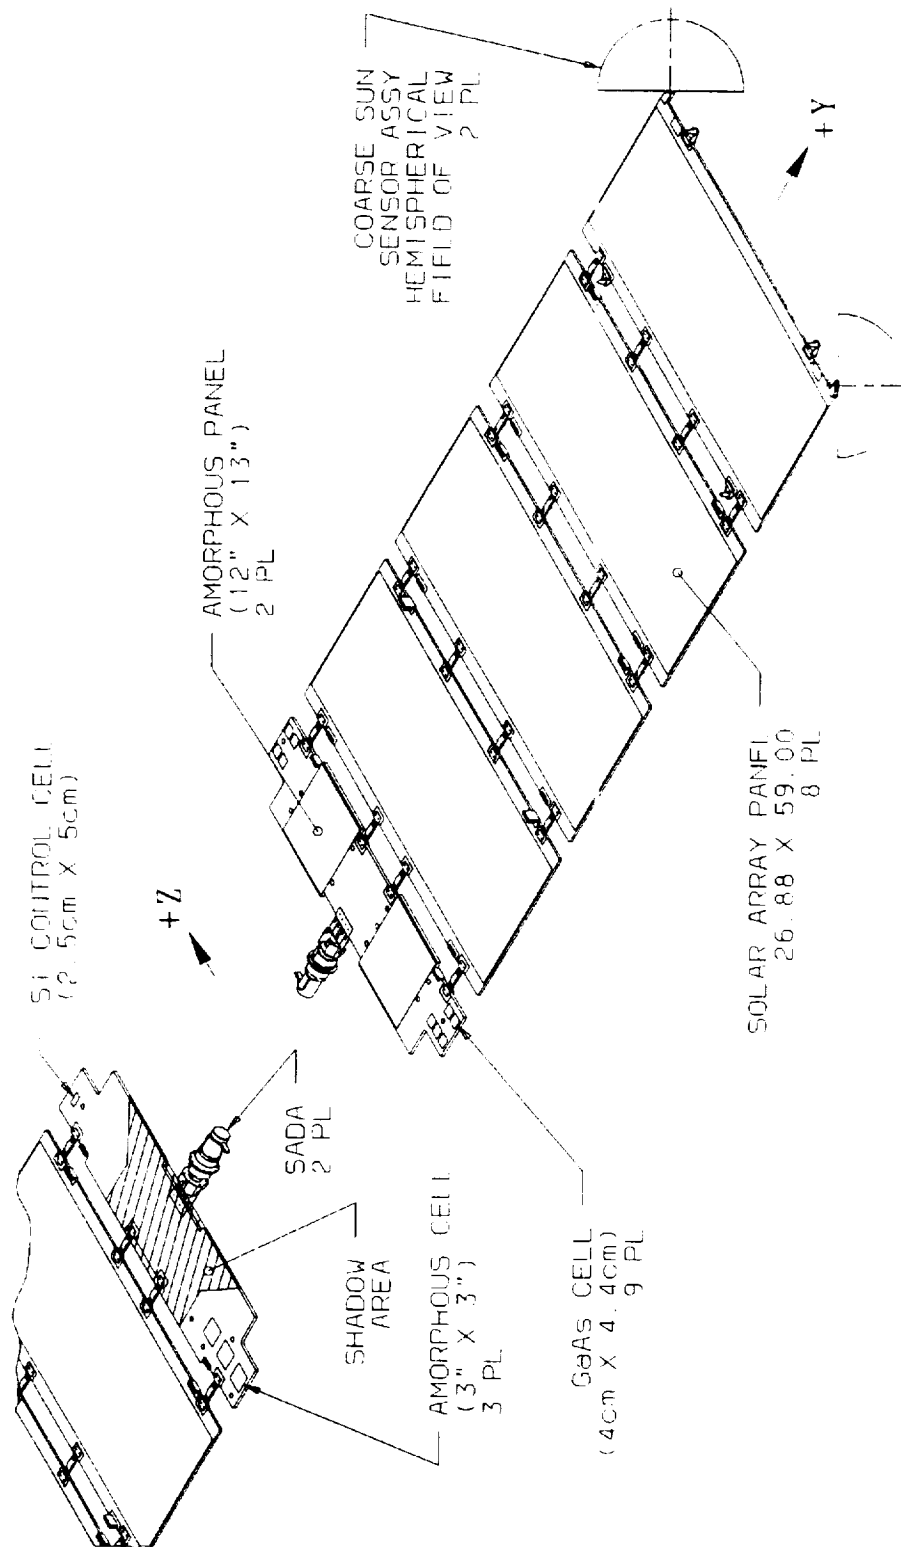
SOLAR ARRAY WING ISOMETRIC VIEW
